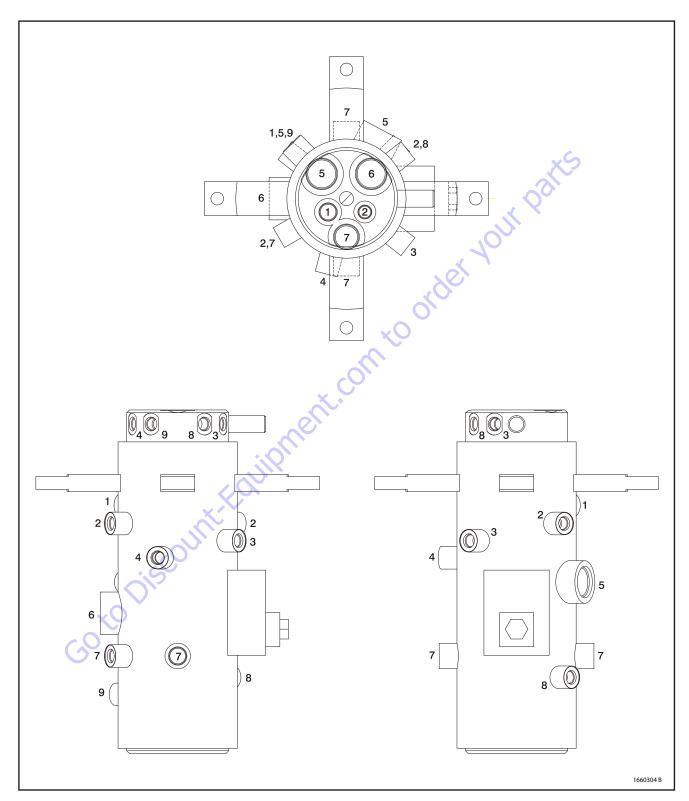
Rotary Coupling Port Location (9 Port) - 4WS (USA Built Machines, SN 0300087000 through 0300138728)
